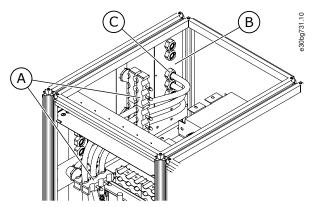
Example of Cable Installation Kits and a Cable Inlet
